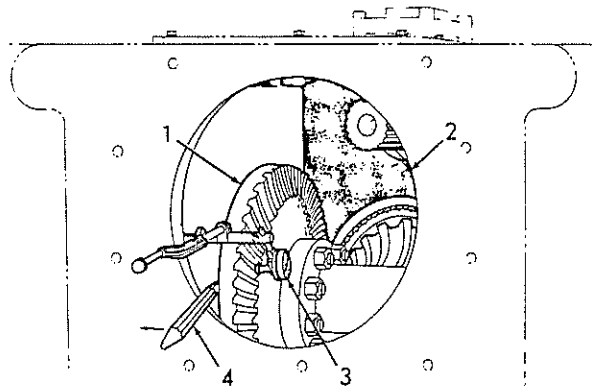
Checking for Bevel Gear End-Play (T-70854)
